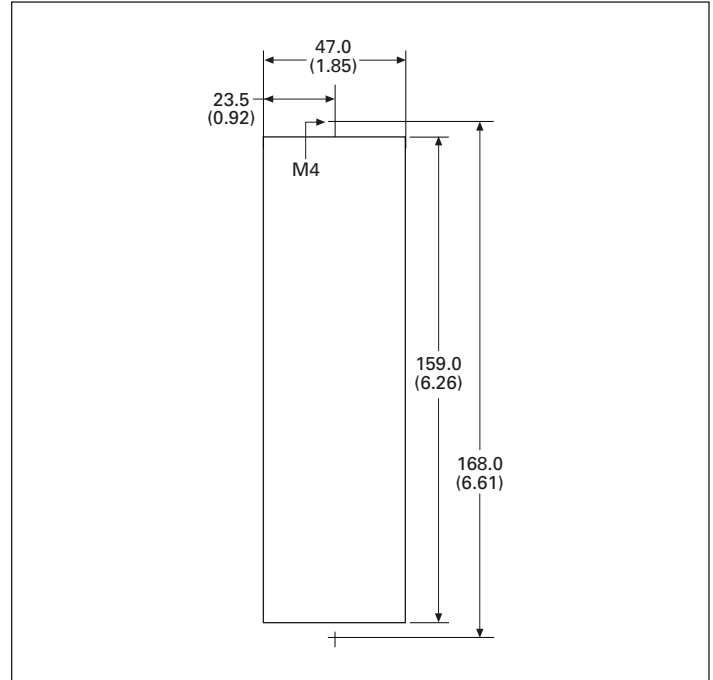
EAFR-101C cutout for panel mounting in millimeters (inches)
